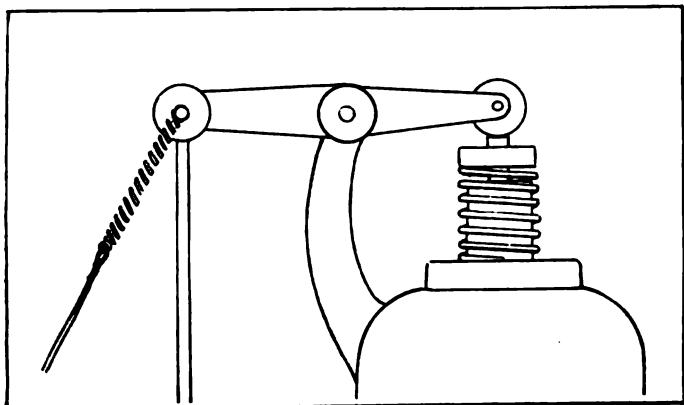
Silencing Overhead Valve by Applying Tension to Rocker Arm.
